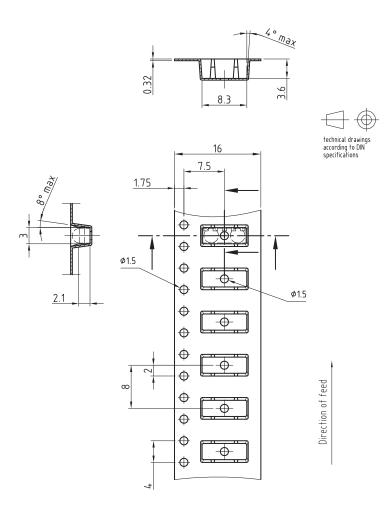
Issue: 1; 12.02.07 20628
